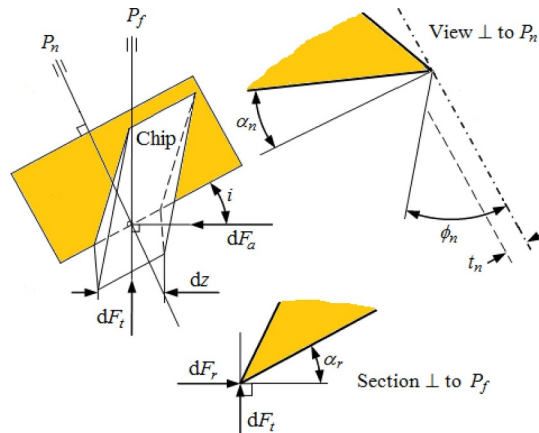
Oblique cutting process for an element of a helical tooth [13].
